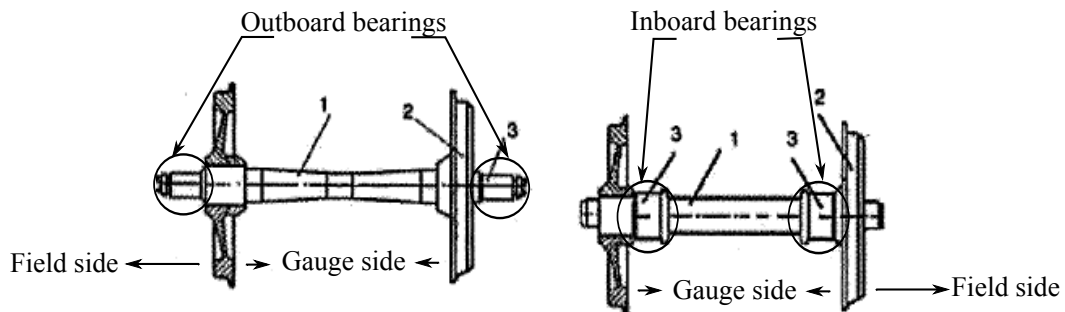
Schematics of axle-wheelsets highlighting the location of outboard and inboard bearings using circular markers [32, Chapter 3, page 41].
